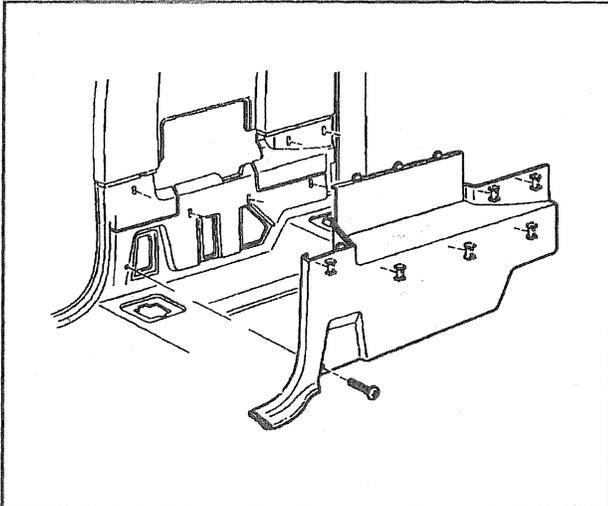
Side Rear Lower Panel (Extended Cab w/o Rear Seat)
